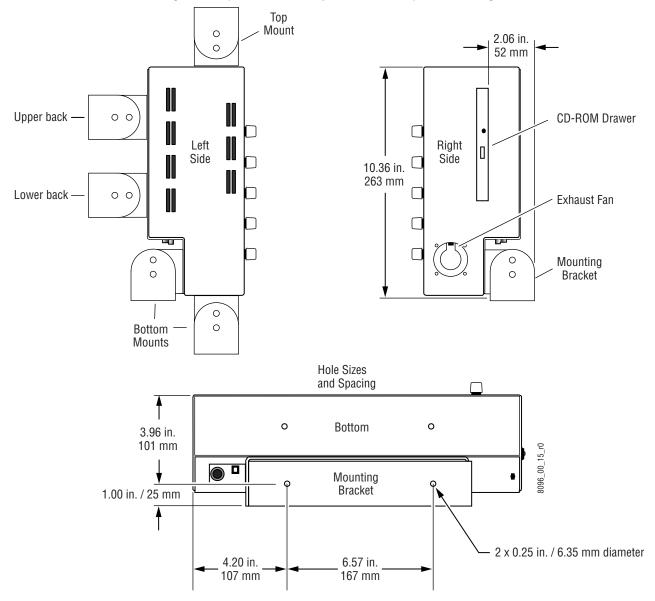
Optional Placement of Menu Panel Adaptable Mounting Brackets
